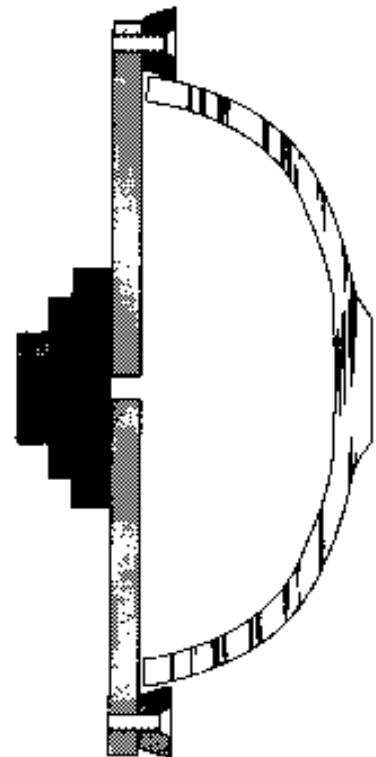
Attach the Jumbo Jaws to your chuck and mount your project to complete turnings.
